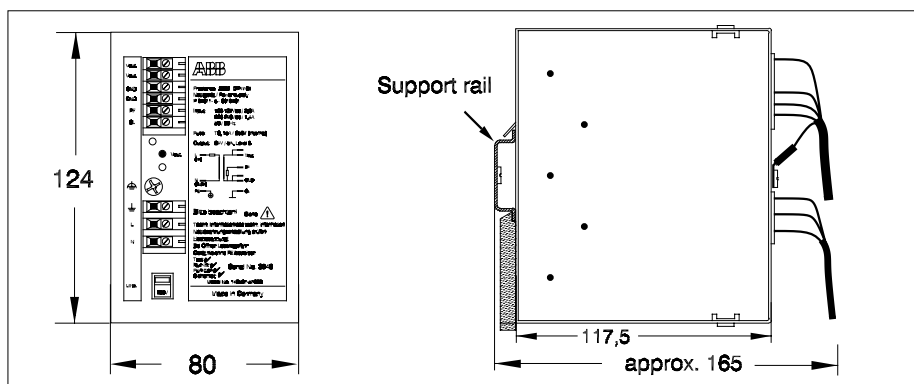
Dimensions and mounting depth of the power supply DPW 01 in mm (115/230 V AC)
